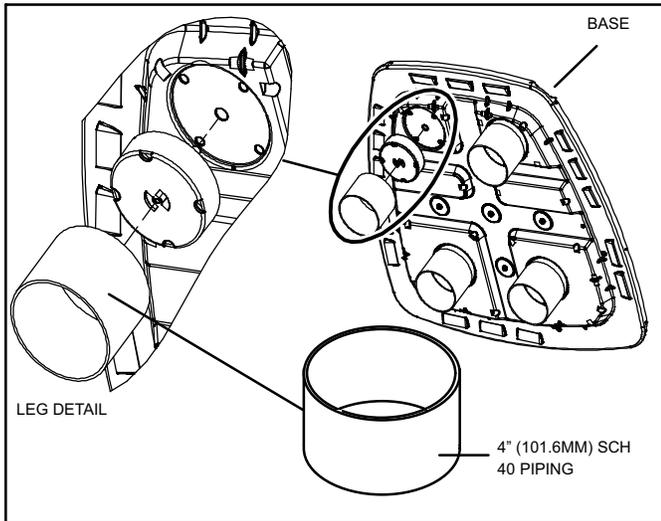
Elevated Slab Mounting using Feet Extenders (Small Base Units)
